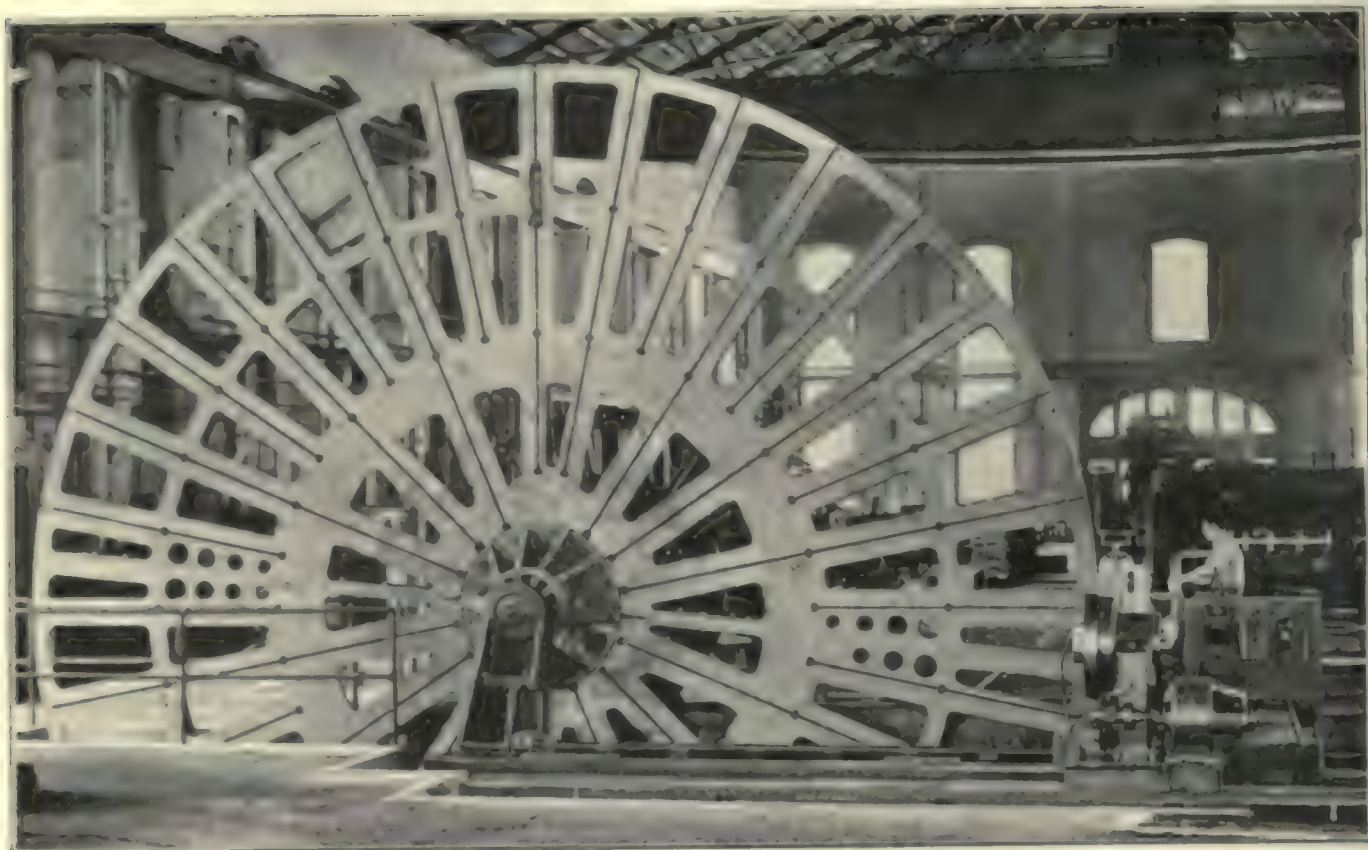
GLEASON GEAR PLANNER AT WATERTOWN ARSENAL. FIG. 2—SIDE VIEW OF SAME MACHINE
